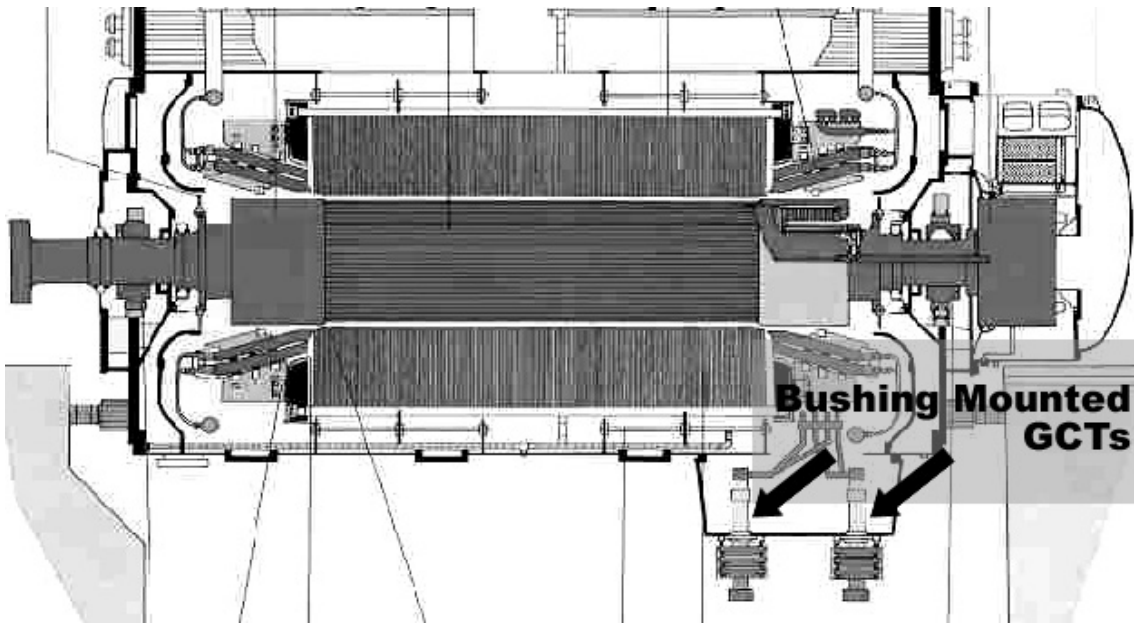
Cutaway View of Generator Showing Installed Bushing Mounted GCTs
